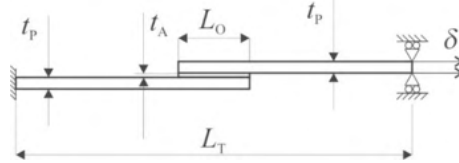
Geometry and characteristic dimensions of the single-lap joint specimens.
